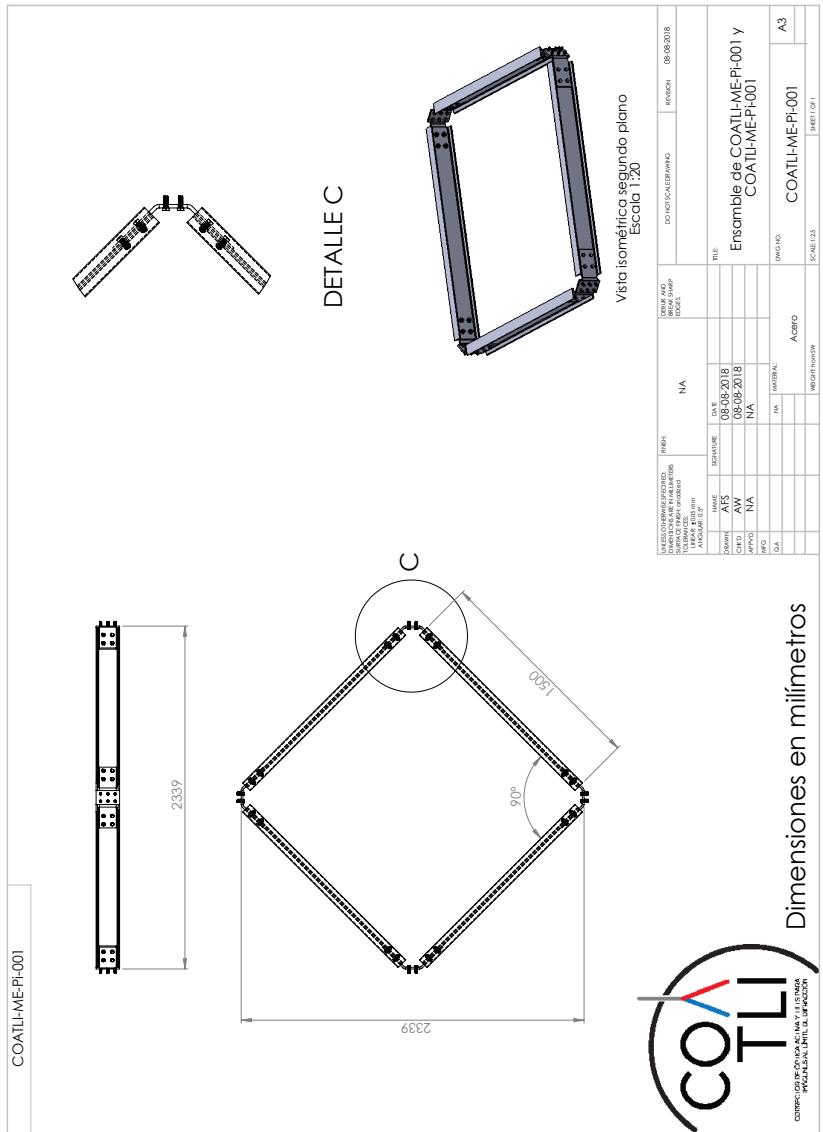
COATLI Modified 2018 design drawing (2 of 3).
